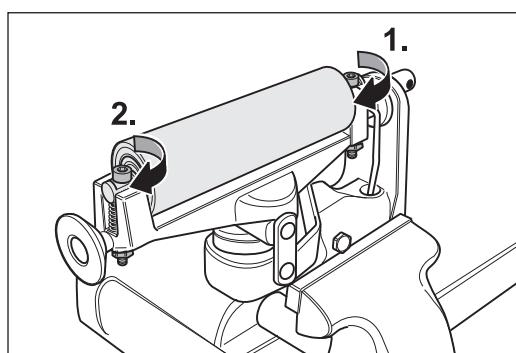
Tighten the side without spring (1) and then the side with spring (2), so that ...
